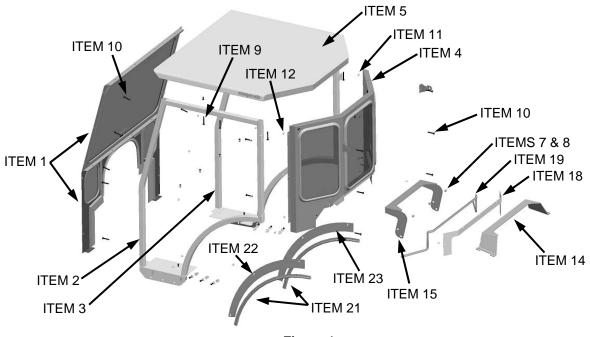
PARTS I.D. AND GENERAL LAYOUT
